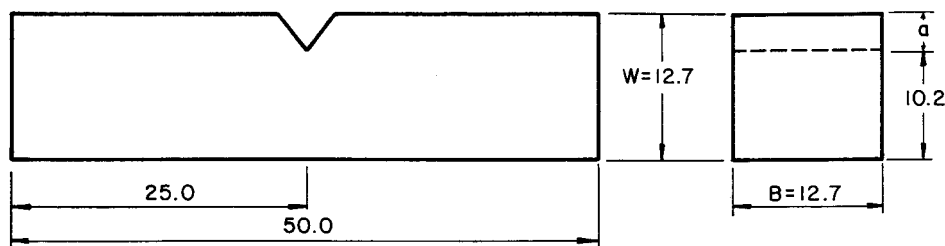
Geometry and dimensions of the Charpy impact test specimens.
